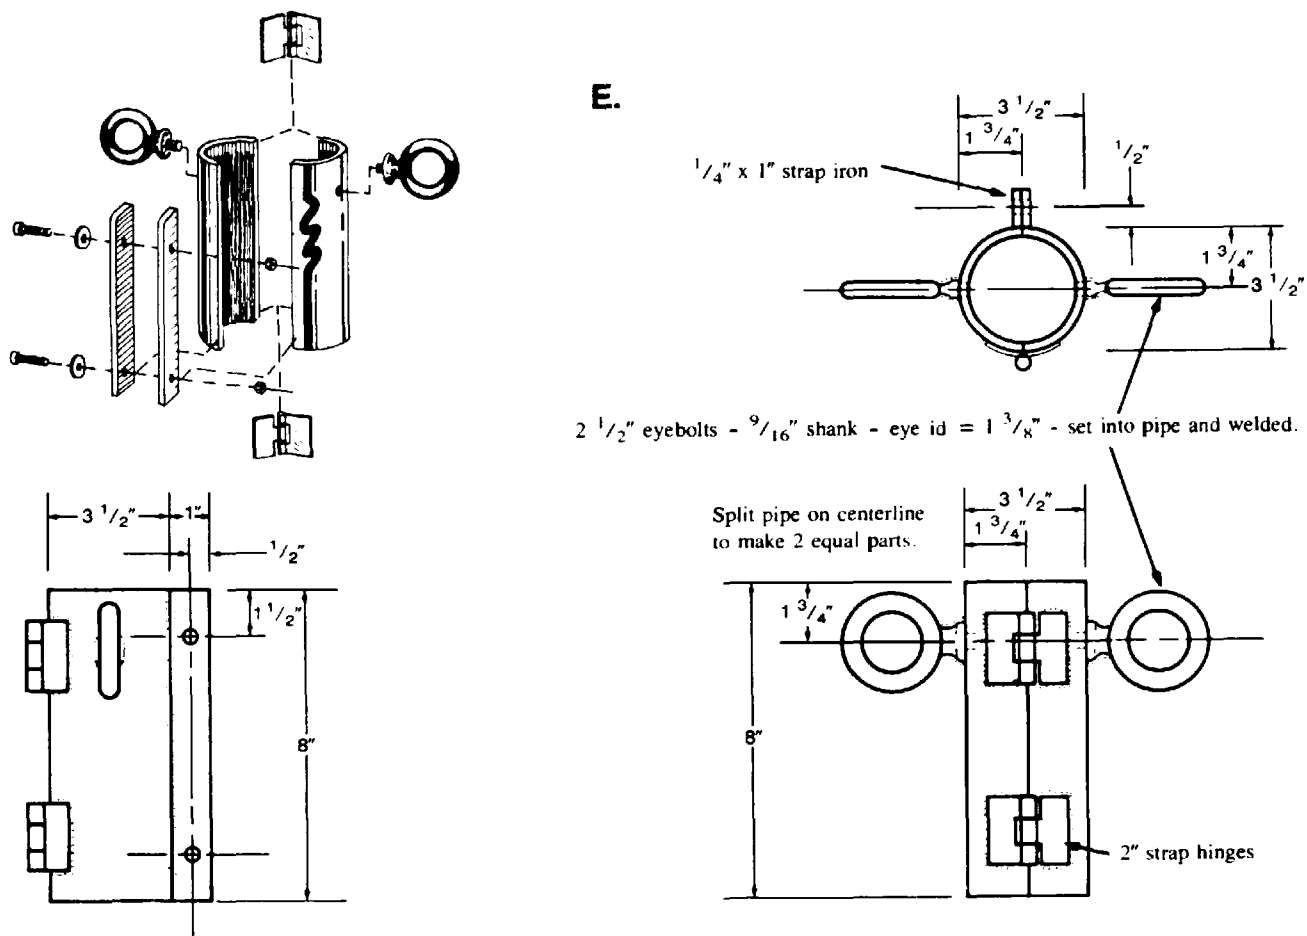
Construction plans for extrusion clamp and vibrator clamp.
